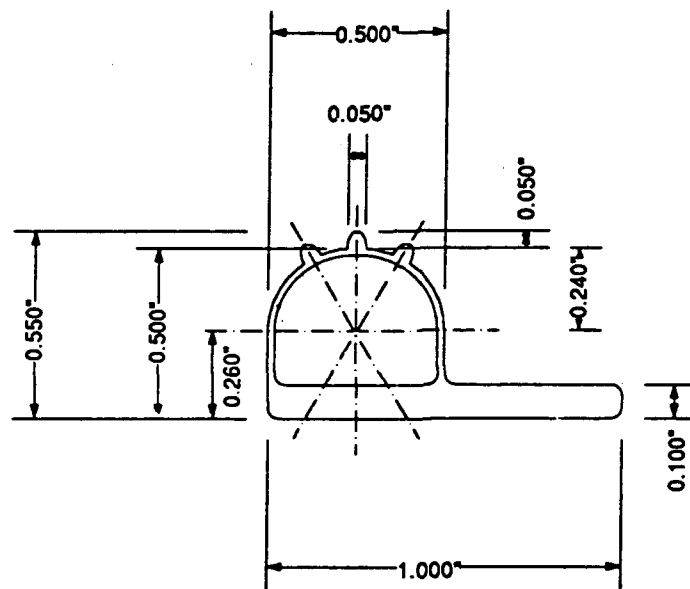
CROSS-SECTION OF GEL-TYPE SEAL
